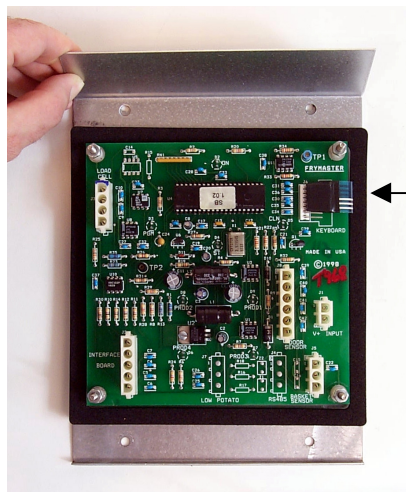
Use the deflector shroud to position the upper edge of the cutout gasket, which surrounds the computer interface board.
